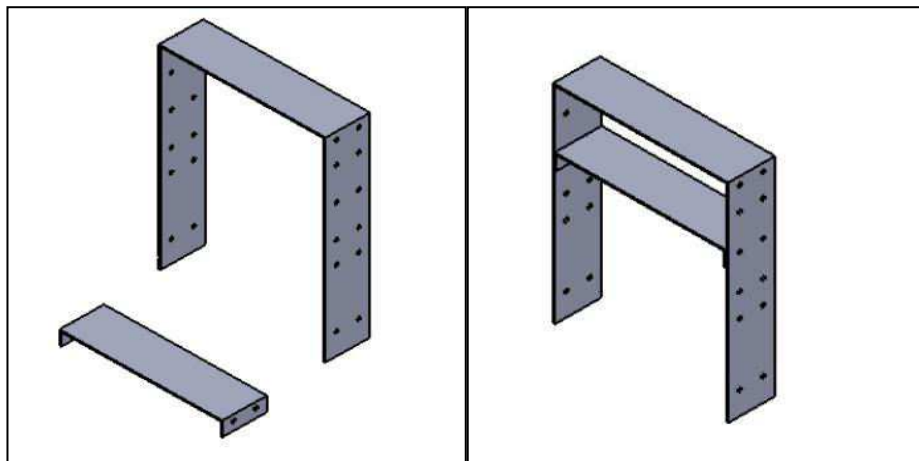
Mild steel frame attached with feed chute of fodder cutter
